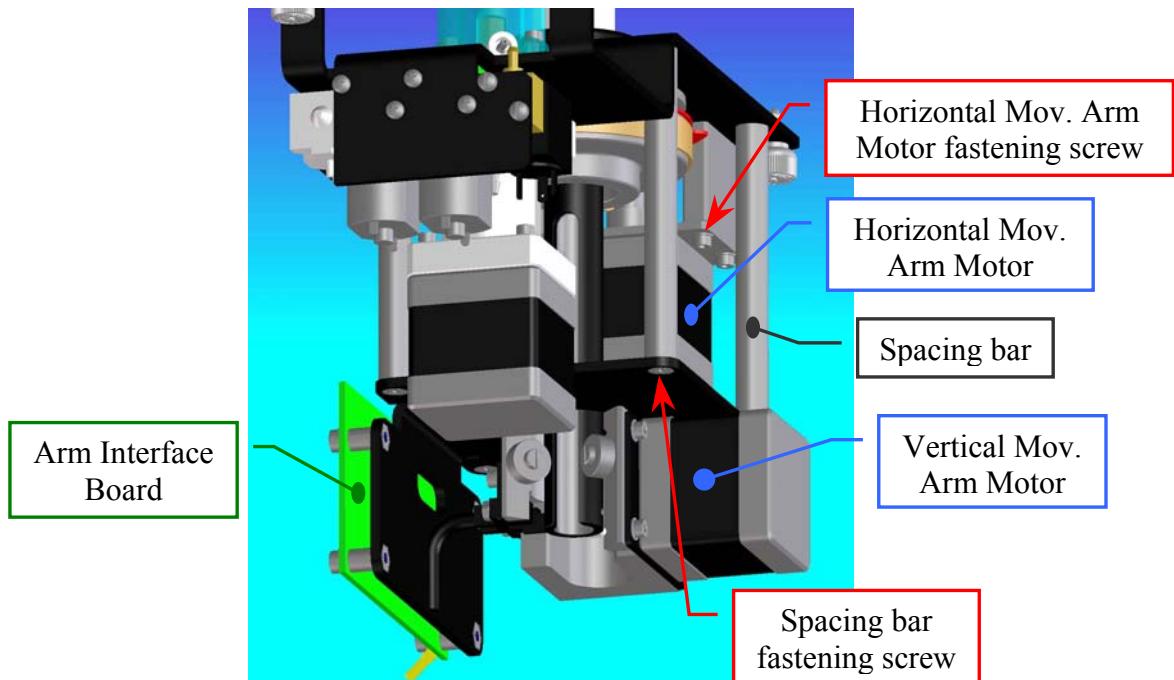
Horizontal Mov. Arm Motor fastening screws
